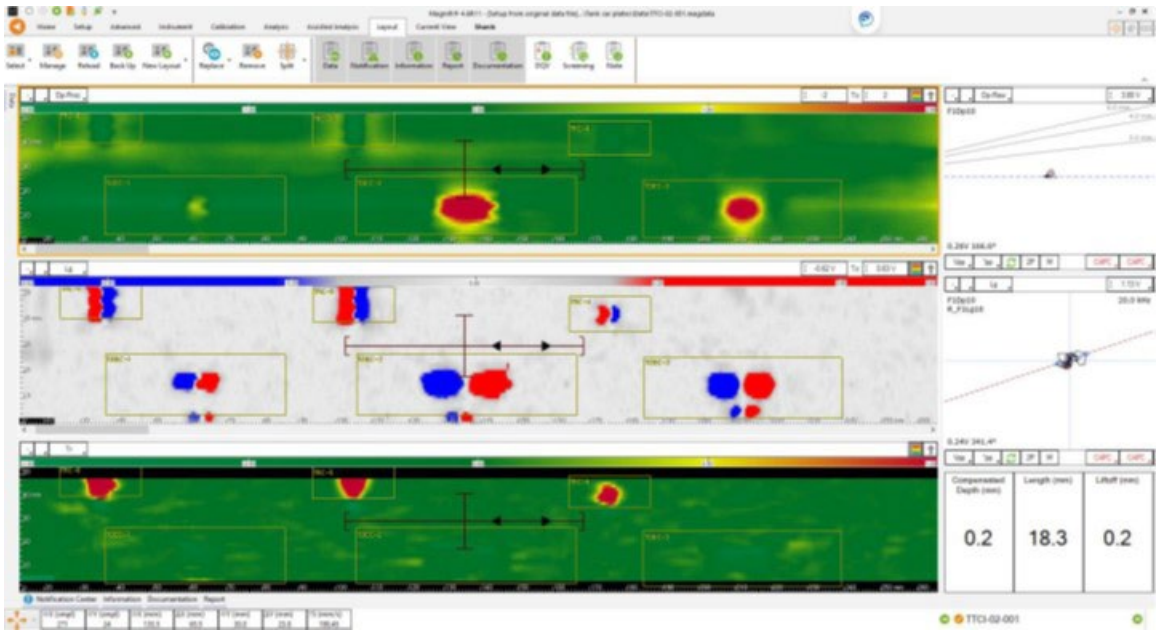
TECA scan results for butt weld TTCL-2 MG panel
